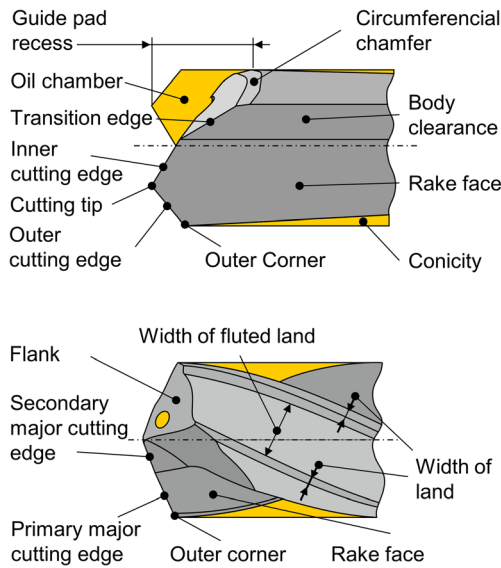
Fundamental drill head design of single-lip and twist deep hole drills [5]
